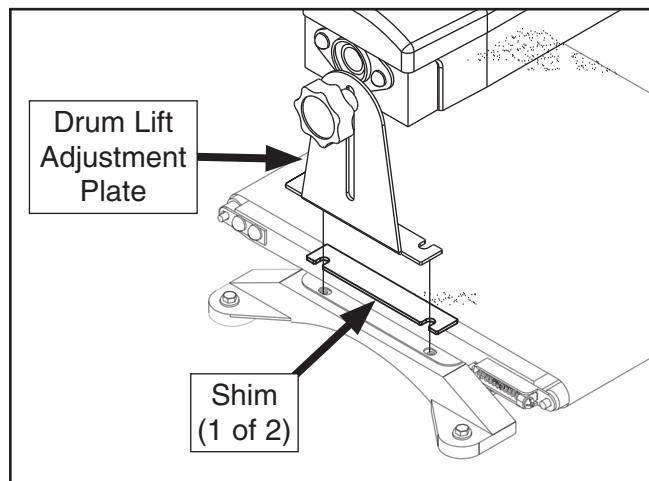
Shim inserted between drum lift adjustment plate and conveyor table.
